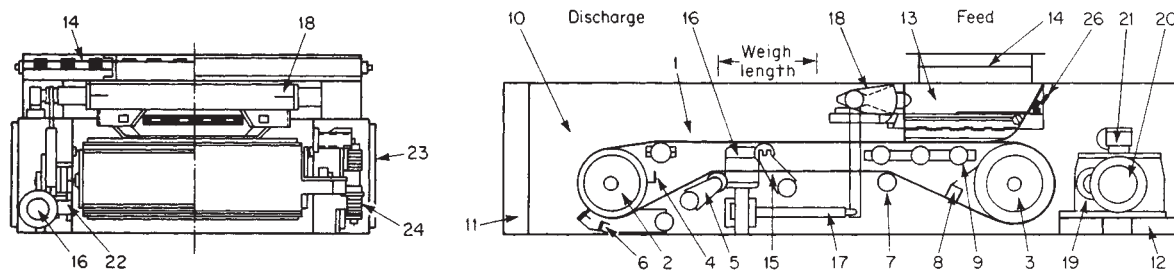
Bulk continuous weigher. (1) Conveyor belt. (2) Head pulley. (3) Tail pulley. (4) Pulley scraper. (5) Spring-loaded take-up assembly. (6) Outer belt scraper (spring-loaded). (7) Belt tracking control. (8) Belt scraper (inner). (9) Pulley scraper. (10) Side channel. (11) Cross channel. (12) Cross channel. (13) Transition chute (optional). (14) Feed-cutoff gates. (15) Weigh idlers. (16) Gate-screw drive motor. (17) Gate screw. (18) Manual gate-adjustment screw. (19) Tachogenerator (optional). (20) Variable-speed drive. (21) Speed adjustment for motor drive (20). (22) Coupling. (23) Side cover. (24) Weight-sensing elements. (25) Hopper storage (optional). (26) Adjustable heel plate (optional). (Howe Richardson Company.)
